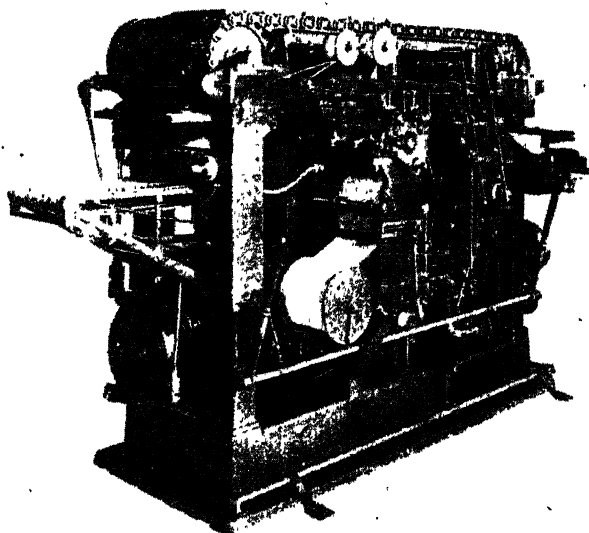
"SMYTH" LINING-UP AND HEADBANDING MACHINE.
